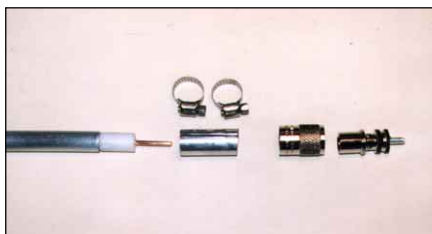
The prepared 1/2-inch CATV cable end, PL-259 plug, adapter sleeve and two hose clamps ready for assembly.
